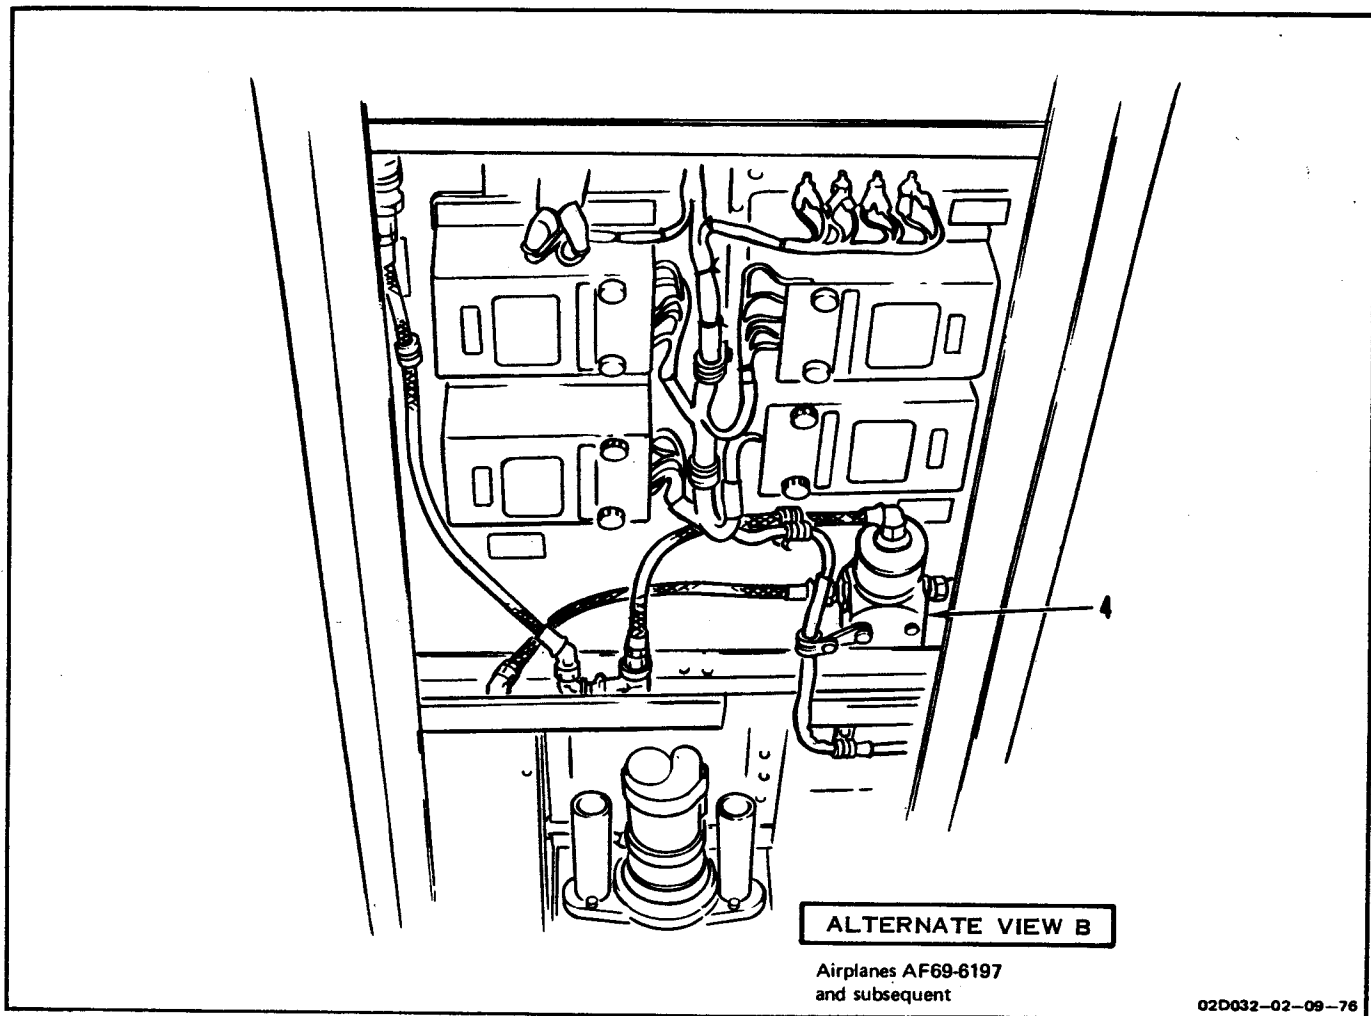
Ejection Control Bypass Valve Removal and Installation (Sheet 2)
